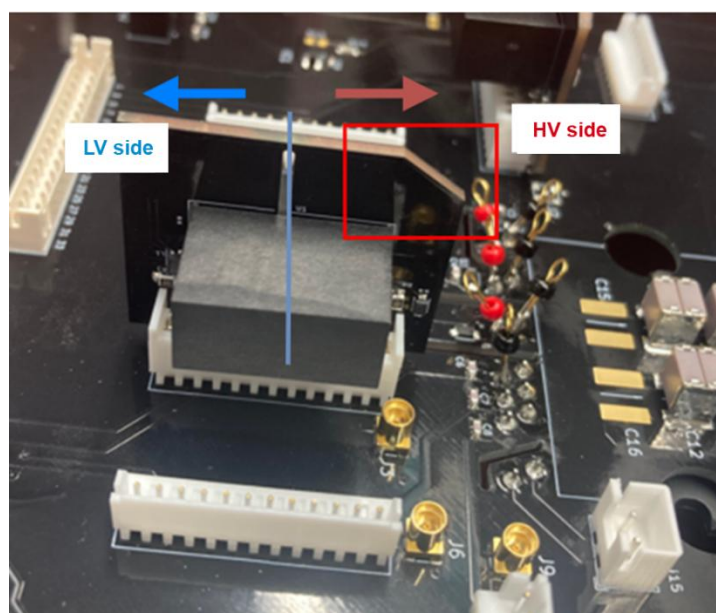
Direction of the gate driver board (the chamfer framed in red is to be placed on the HV side)
